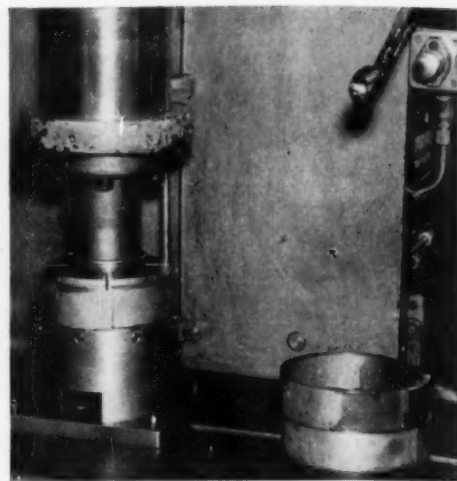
The segmental die in this press is used to expand each brake band ring to bring the ID to final size.
